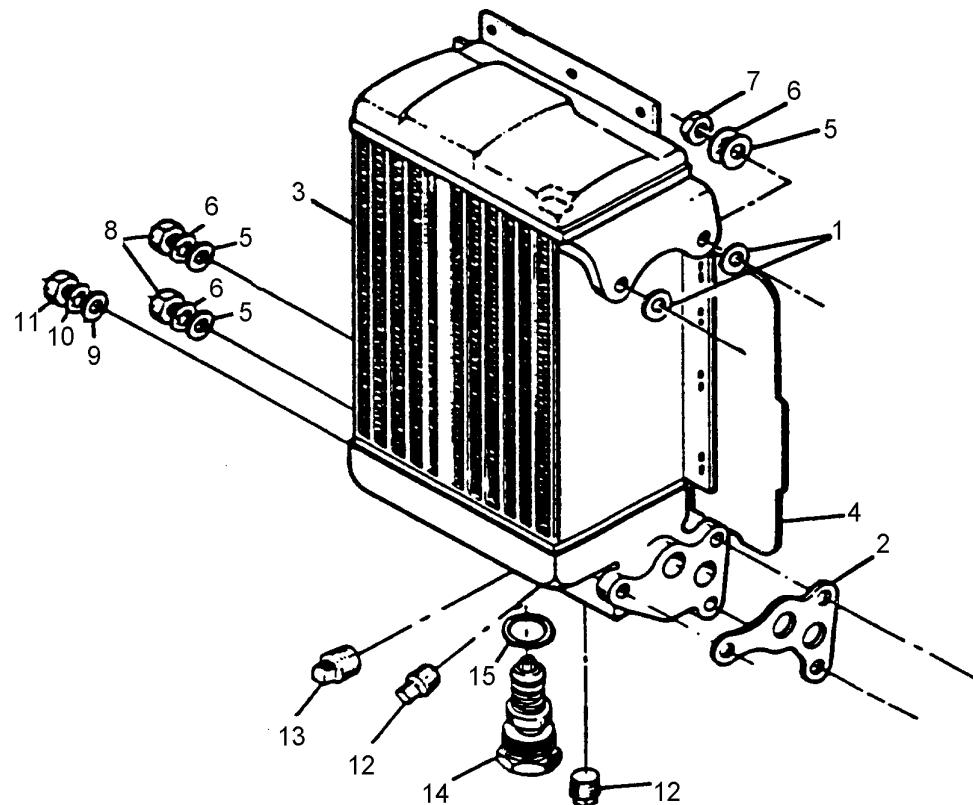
B. OIL COOLER ASSEMBLY FOR IO-550-C
